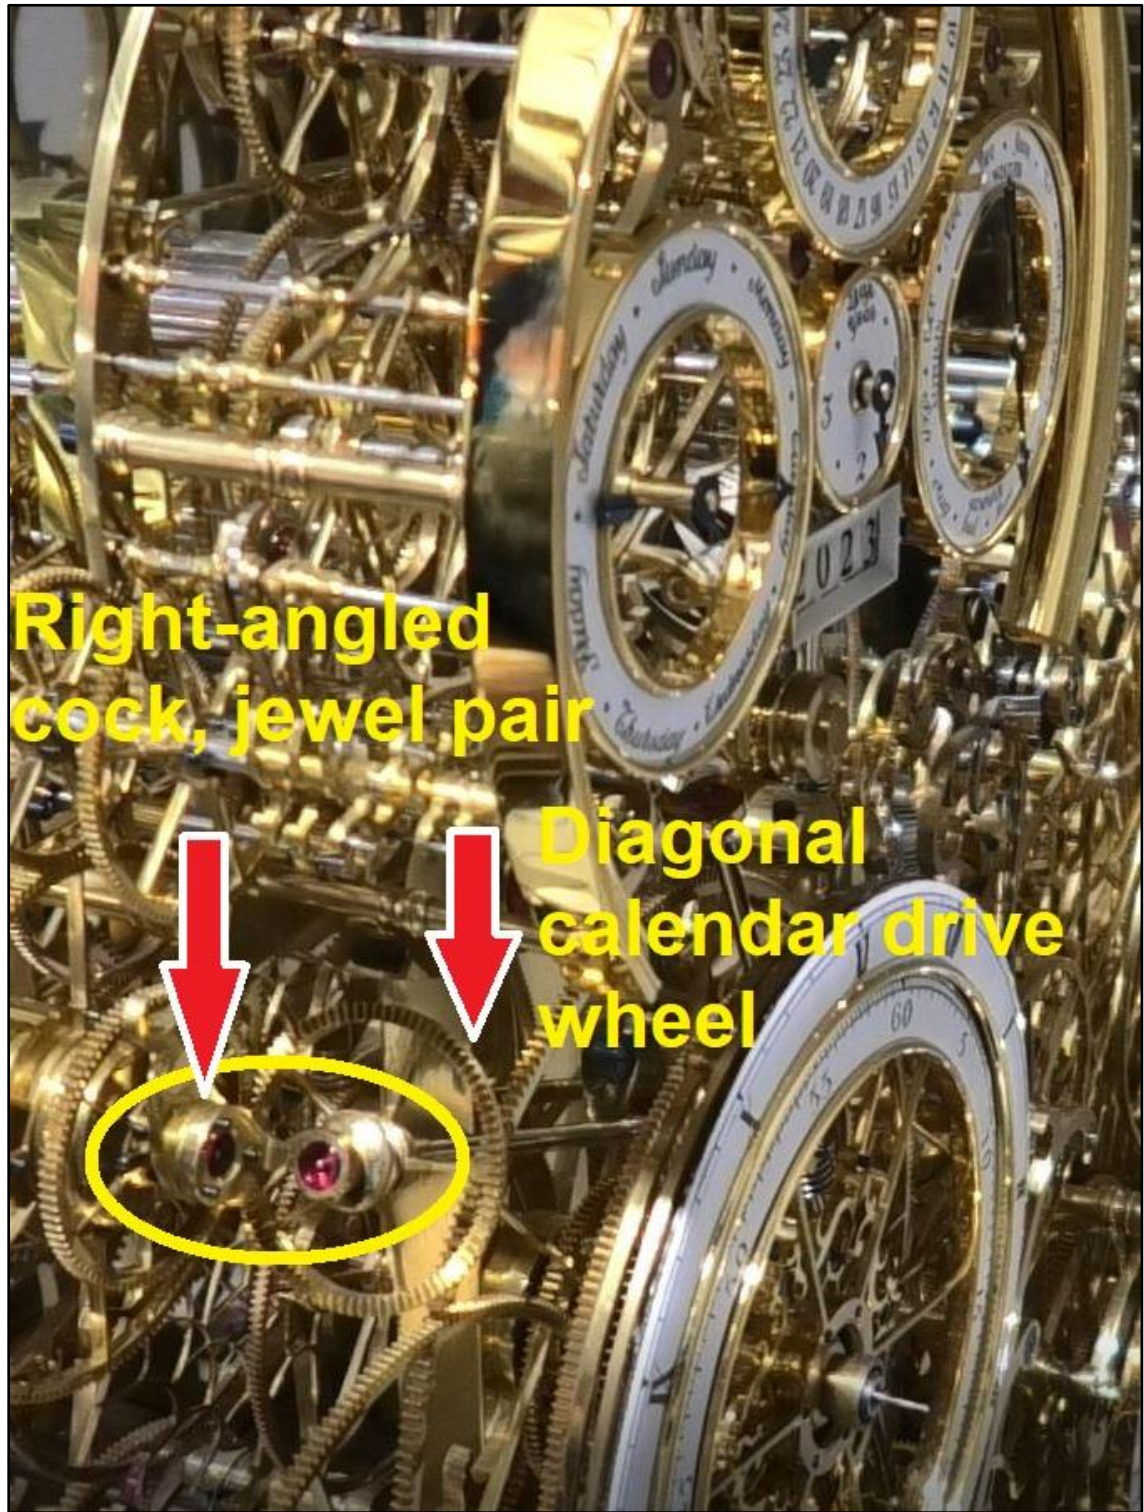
Cock and left jewel mounted to calendar, right jewel supports diagonal calendar drive wheel.
